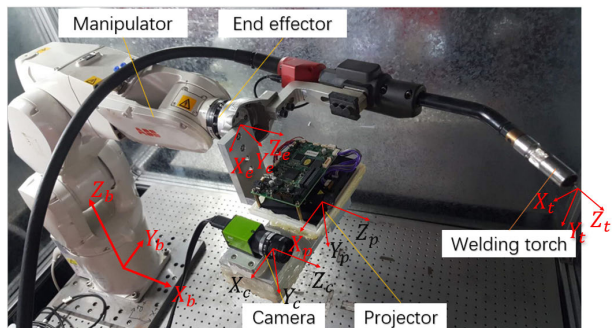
The camera-projector rig-based welding robot system.
